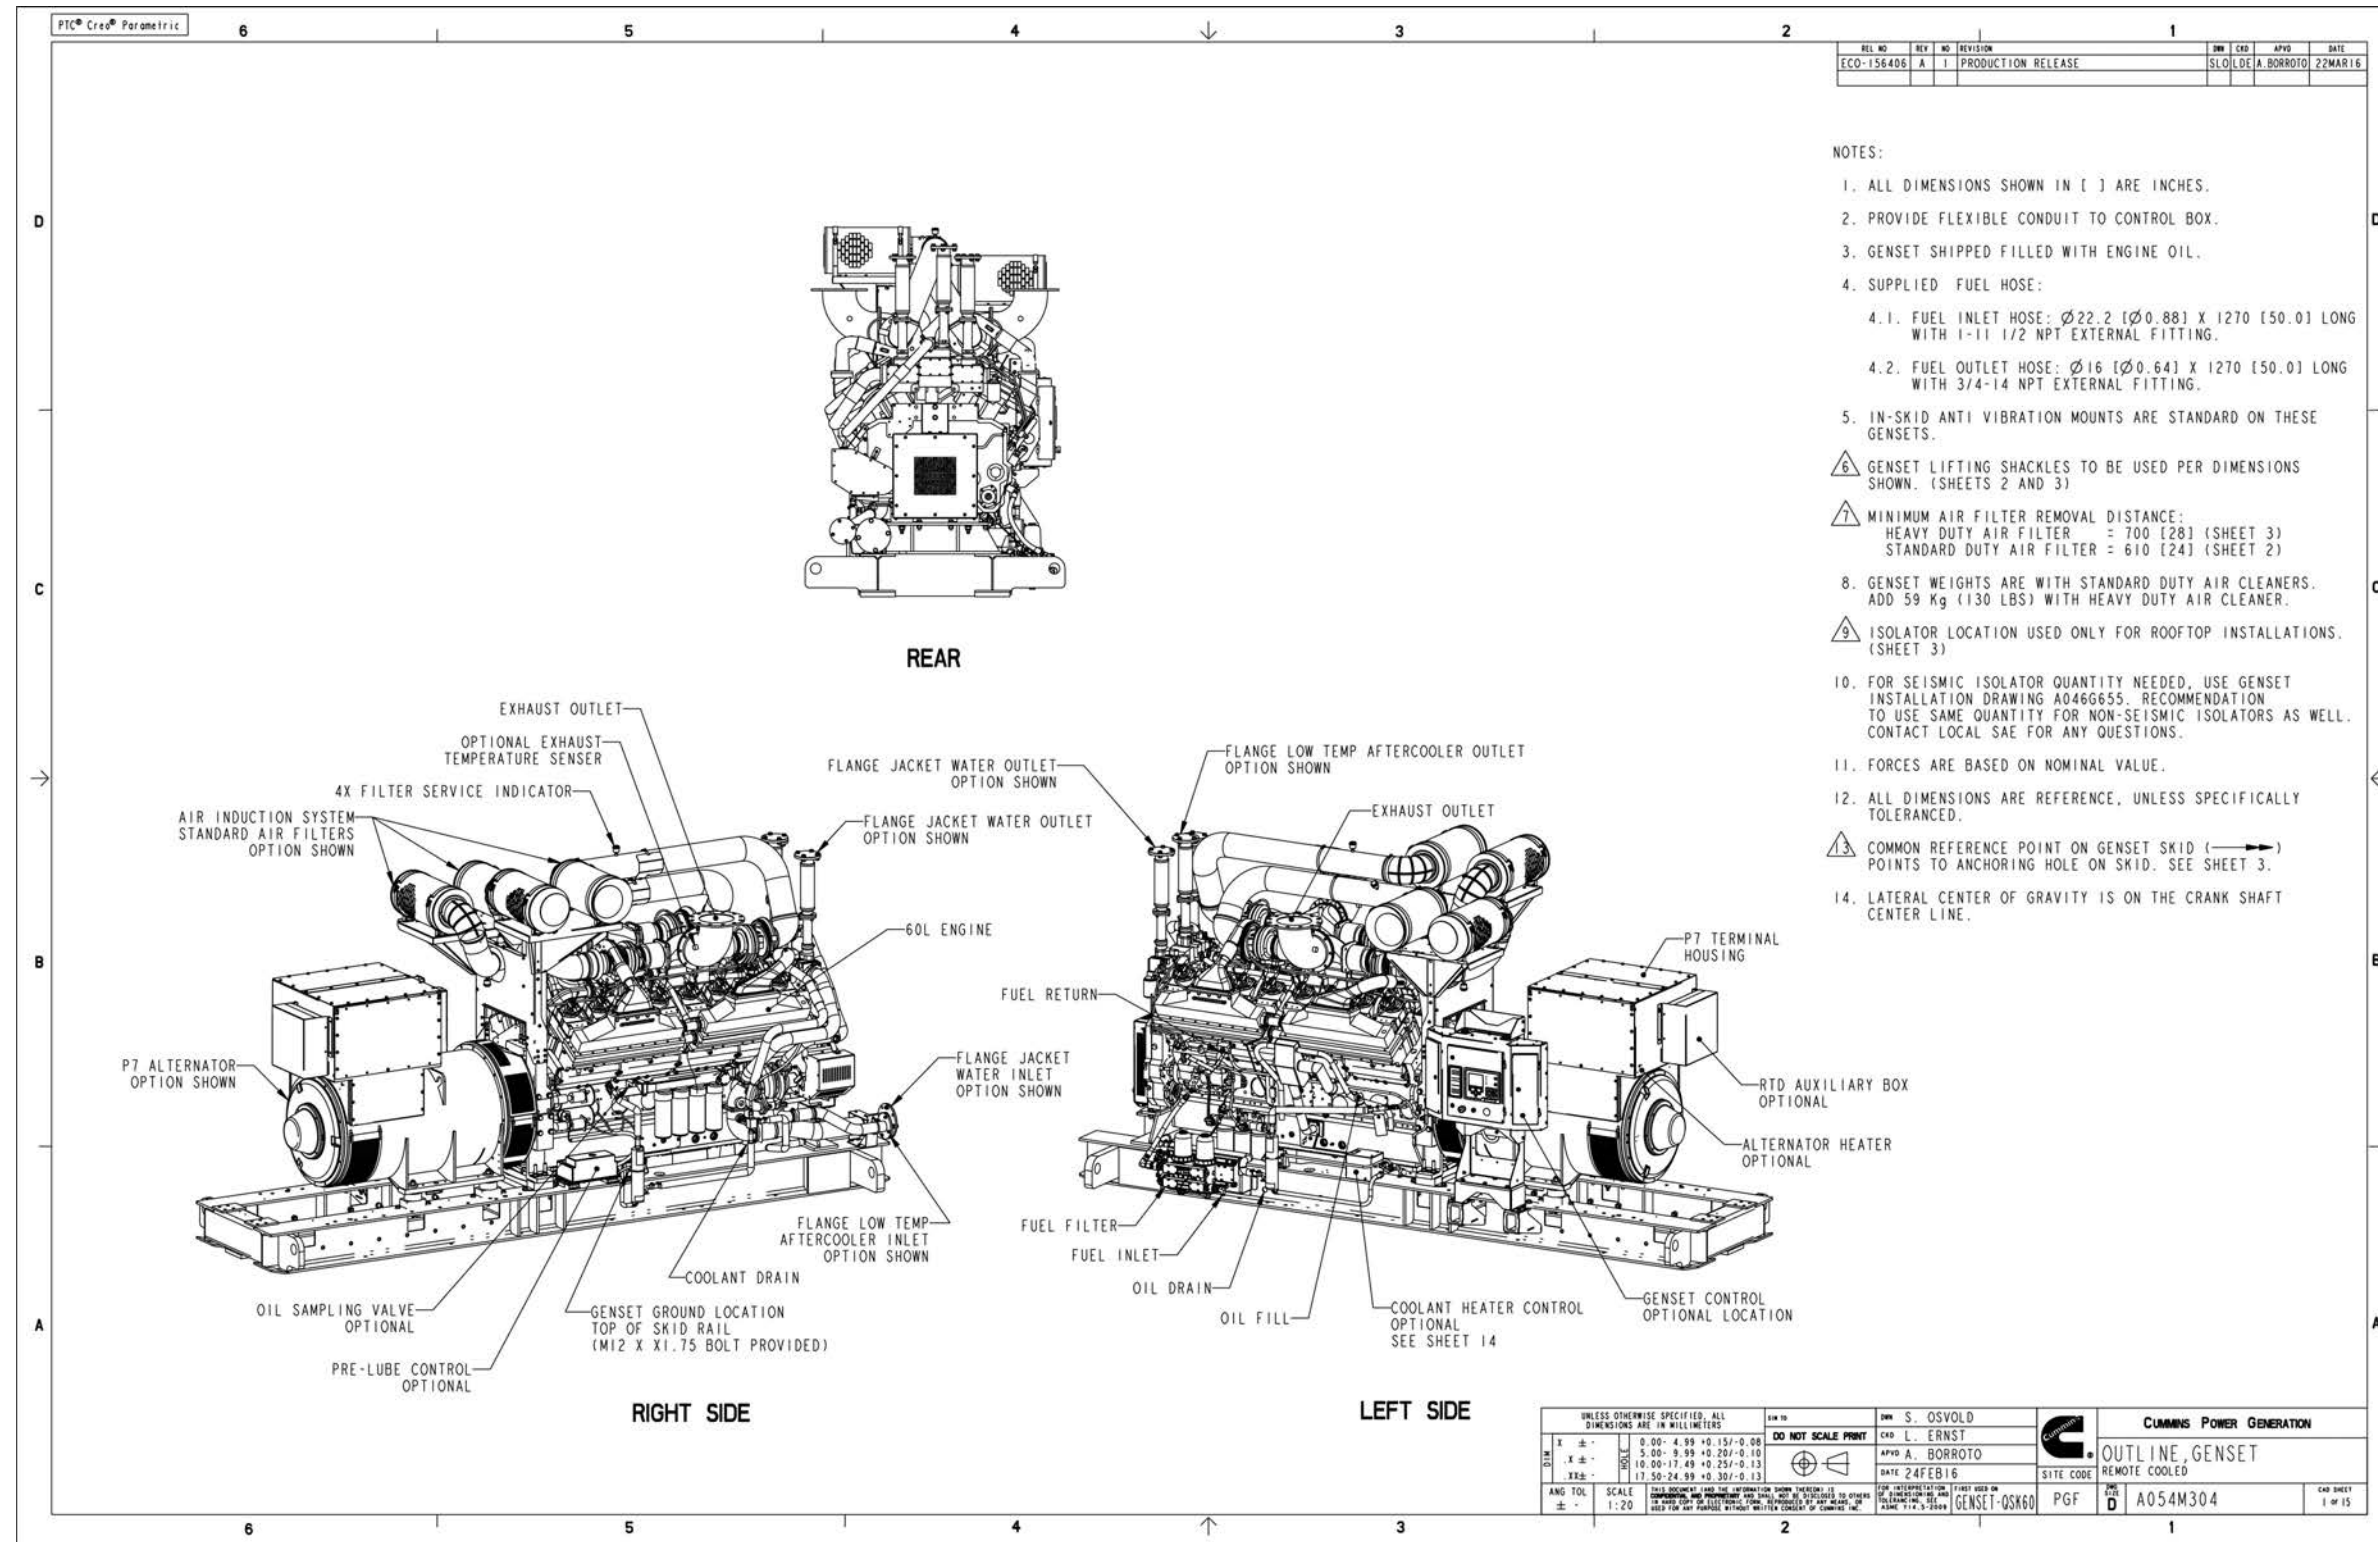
GENERATOR SET WITH REMOTE COOLING OUTLINE DRAWING (SHEET 1)
